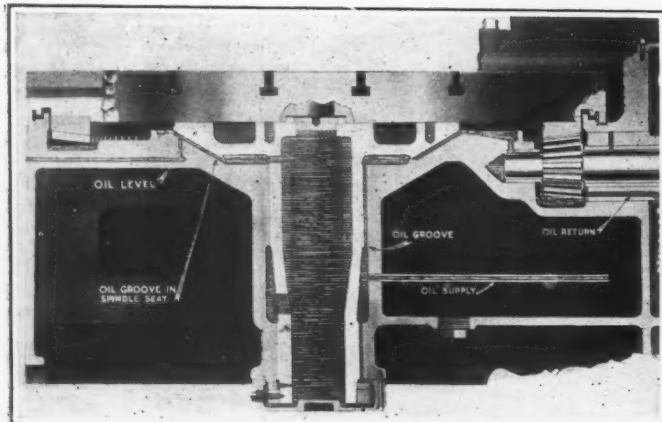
A Continuous Flow of Oil lubricates the Table Spindle and the Overflow oils the Table Gear and Pinion as well as their Bearings
